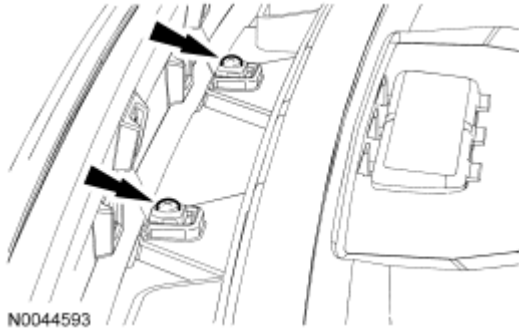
Locating Roof Opening Panel Air Deflector Screws
